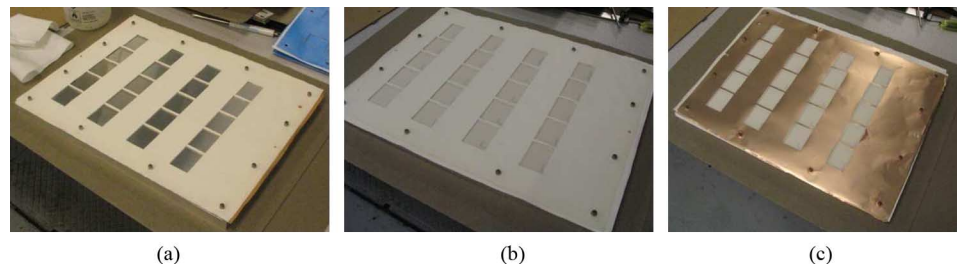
Photographs of the alignment step during fabrication. (a) Bottom prepreg layers placed on the alignment board after forming the cavities. (b) Total stack-up including the middle LCP layer and the top prepreg layers. (c) The metal copper layer placed to form metal layer M4.
